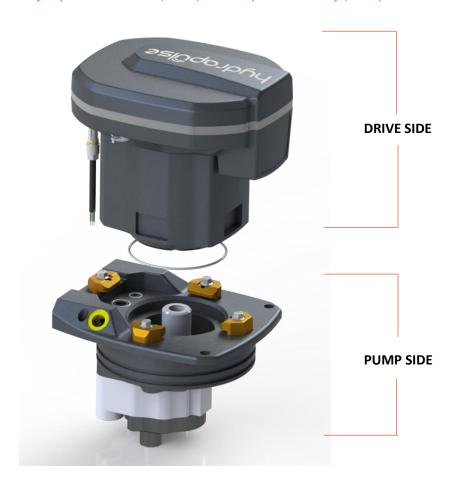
Hydrapulse® Drive Side (above) and Pump Side assembly (below)
